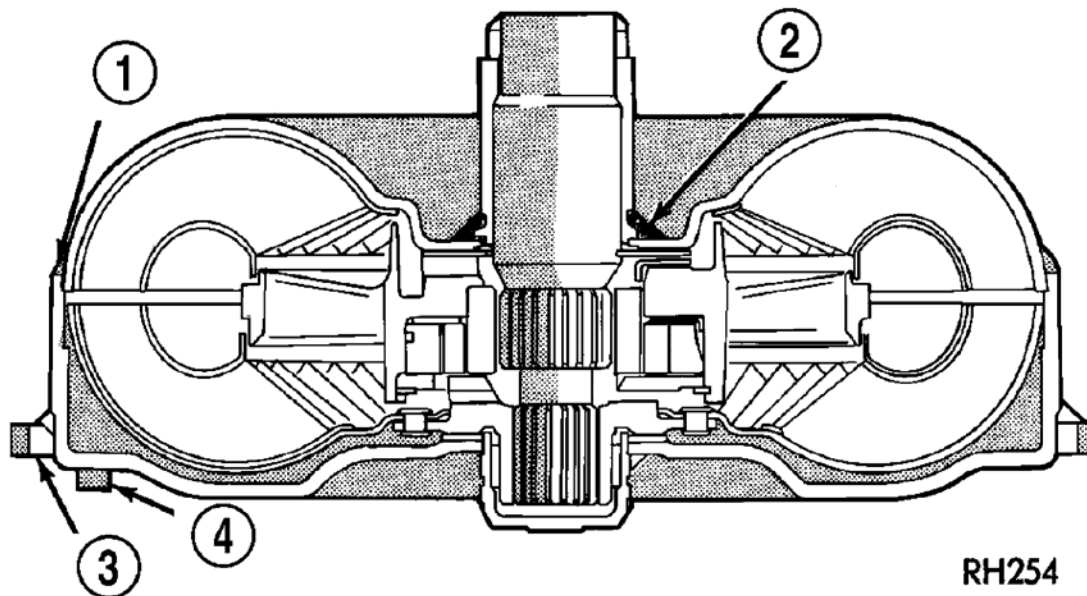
Outside Diameter Weld, Torque Converter Hub Weld, Starter Ring Gear & Lug
